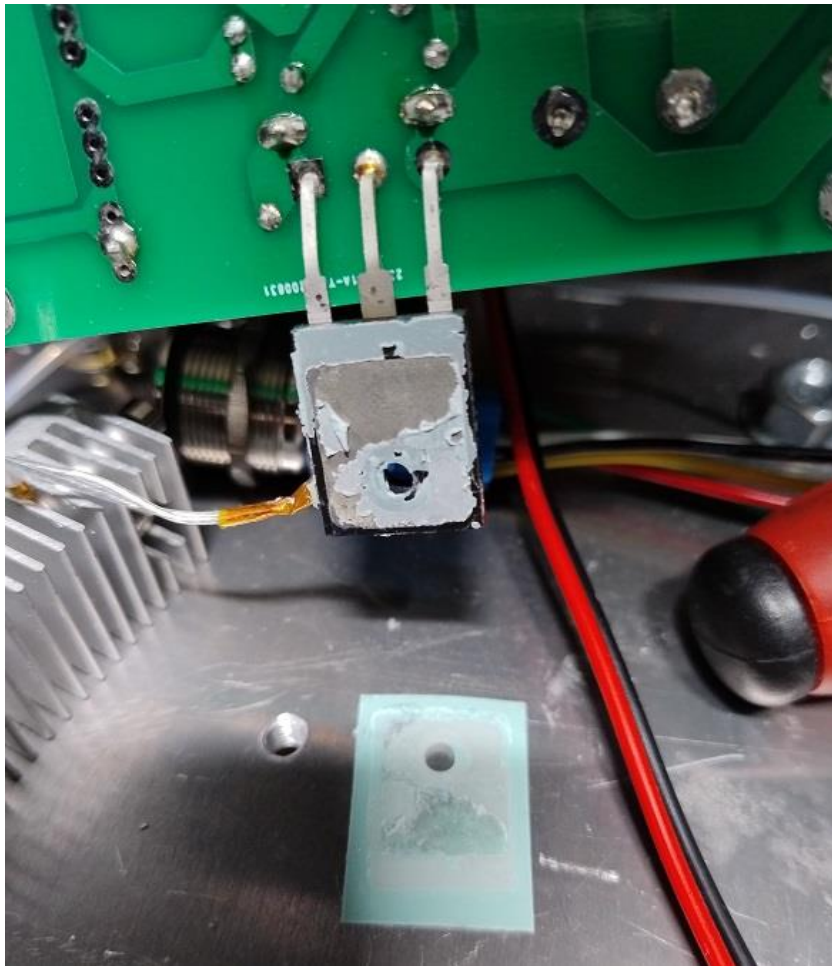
Dissassembly of Bergquist HF625 Phase Change experiment.
